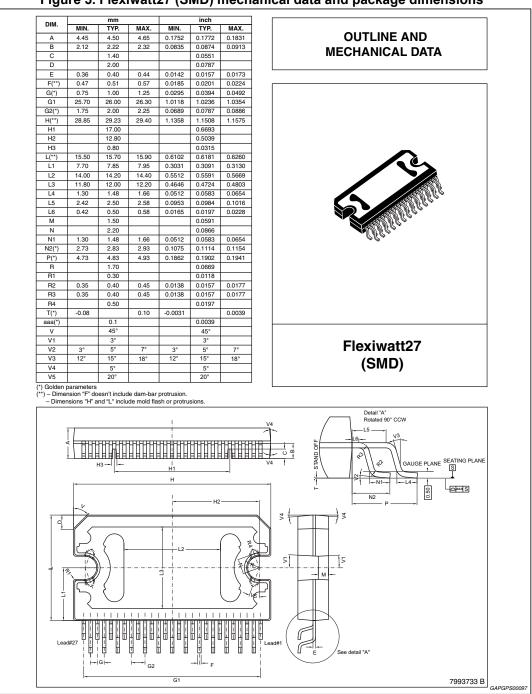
Flexiwatt27 (SMD) mechanical data and package dimensions
